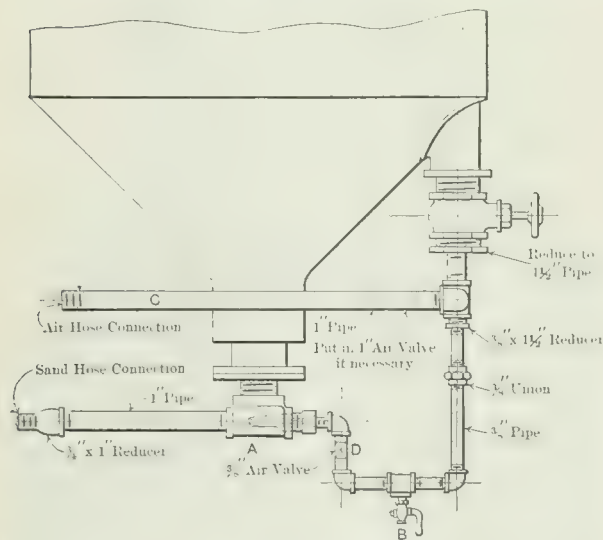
A Low-Pressure Sand Blast Machine Adapted to the Kelly High Pressure System.
